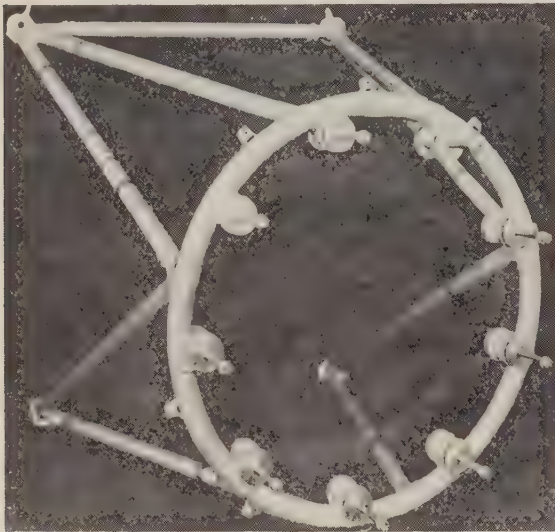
STANDARD ENGINE-MOUNT ASSEMBLY FOR AT-6C AIRPLANE
